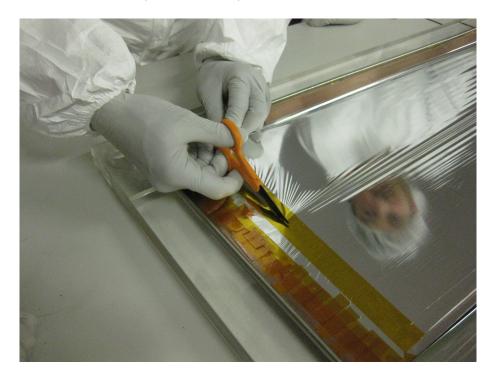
A wide piece of kapton tape is placed across the thin-film panel, coming just short of spanning the entire width. This tape can then be safely cut through to remove any thin-film panel which must be saved.
